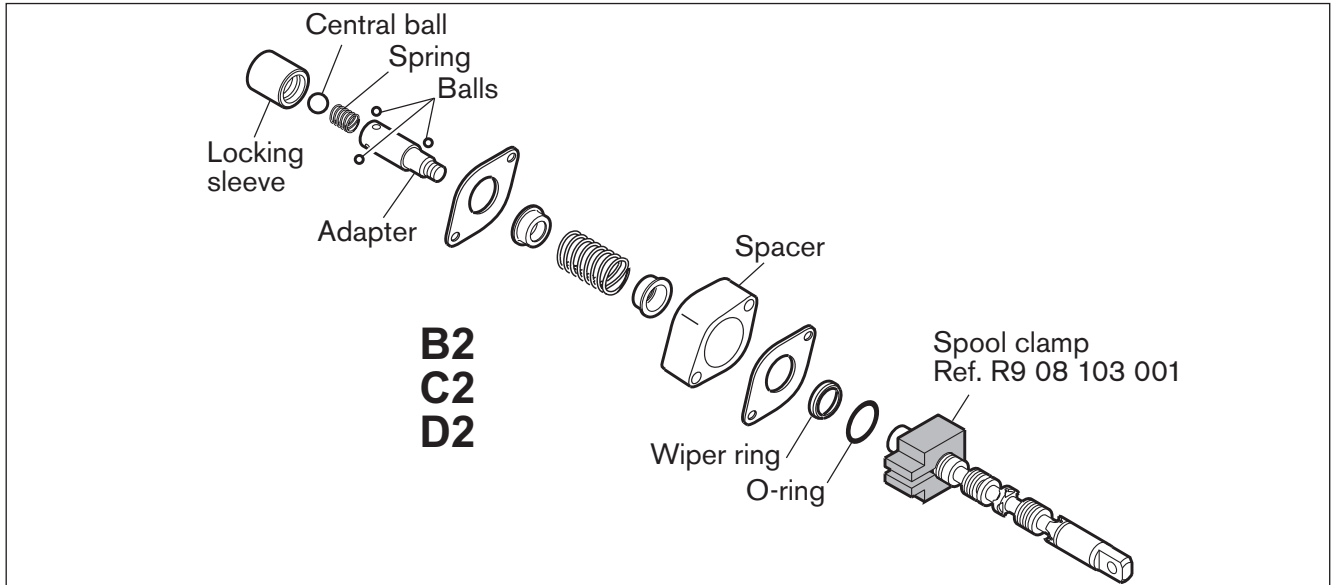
Exploded view of mechanical detent system position 1, 2 or 1 and 2
